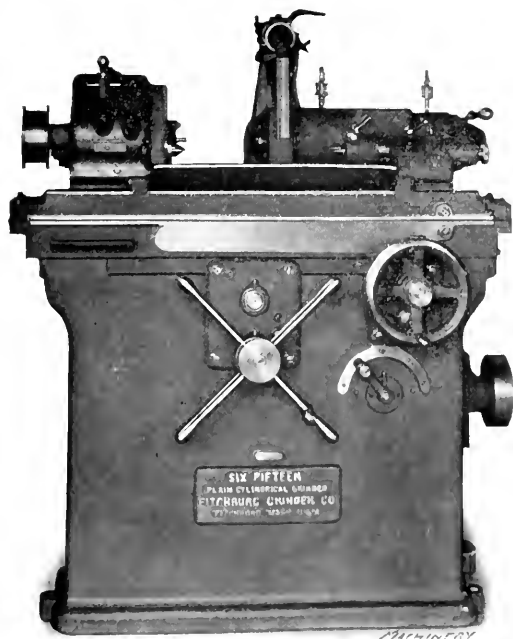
Front View of Fitchburg Style B Plain Grinding Machine
